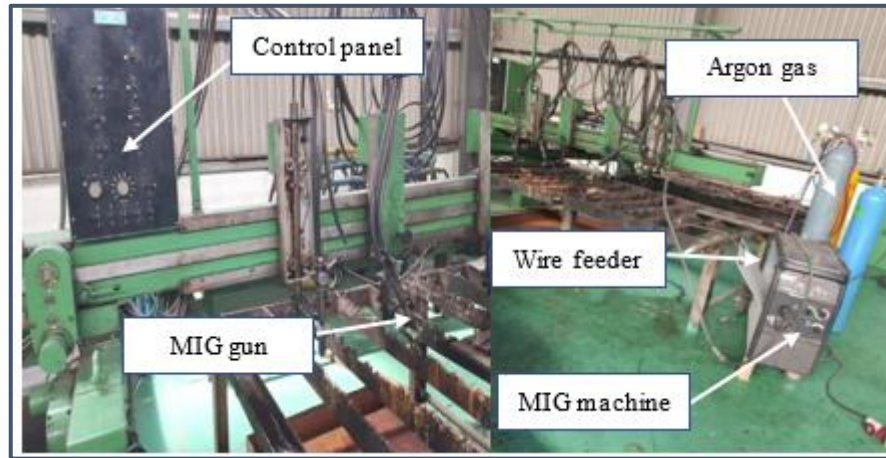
Automatic MIG welding machine (MIDI, Addis Ababa, Ethiopia)
